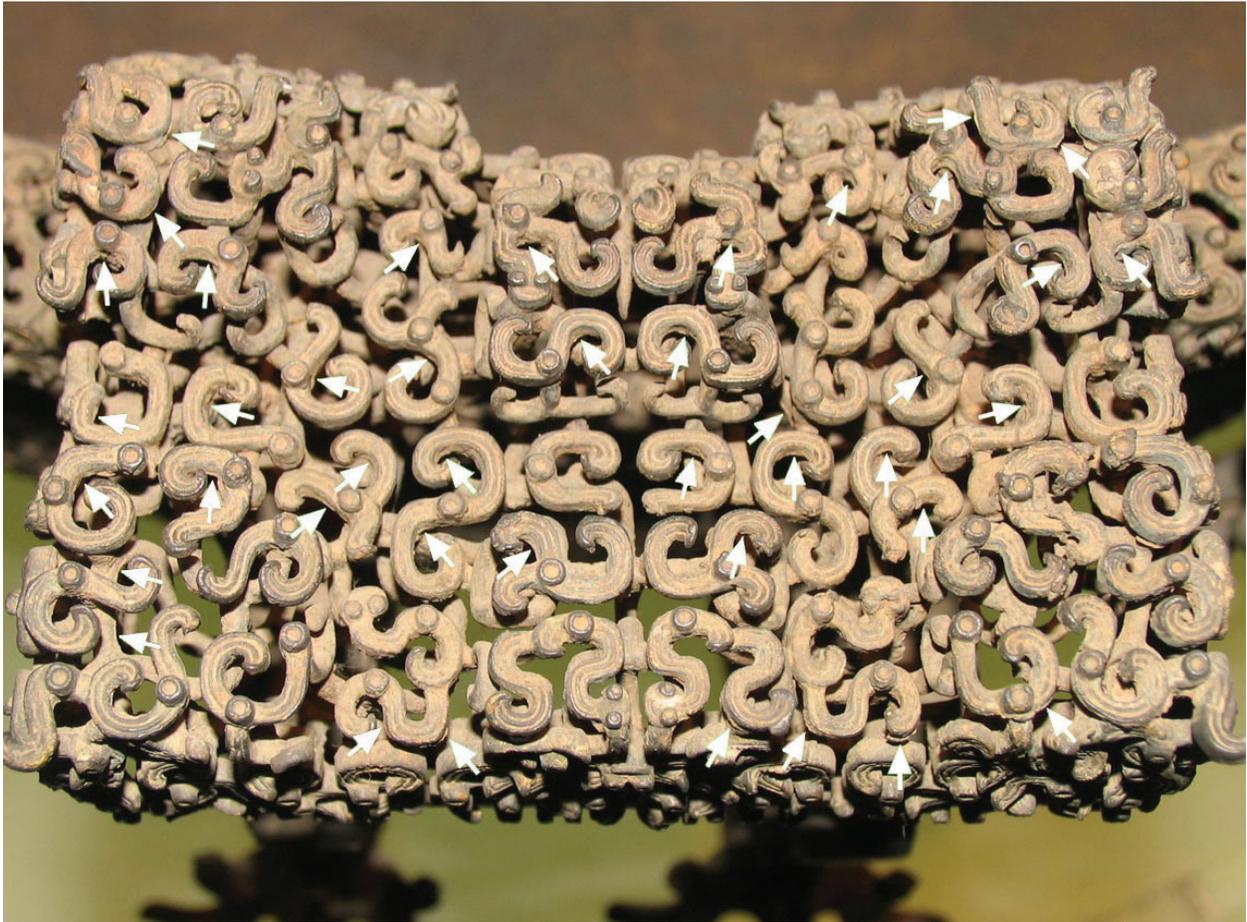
Detail of snakes/dragons design on the Zenghouyi zun (fig. 4) with arrows pointing to casting fins. They could have been formed either by lost-wax casting or by piece-mold casting. After Huang et al. 2008, 101, fig. 6.
